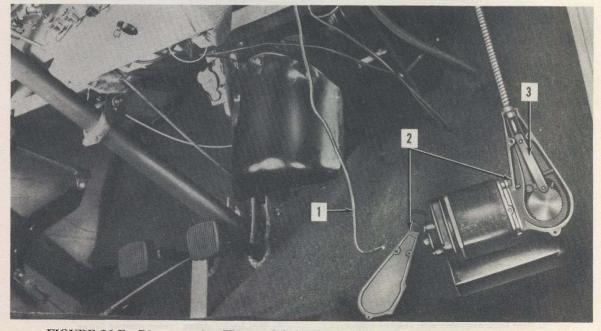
E-Disconnection Wire and Cable from Motor and Transmission Assembly.
